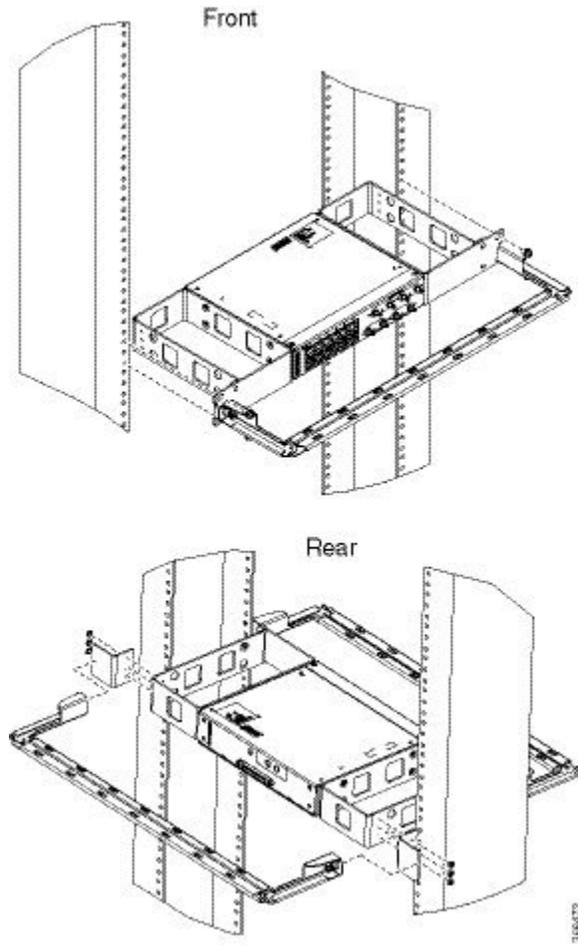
Attaching 19-inch Brackets to Patch Panel - Dual
